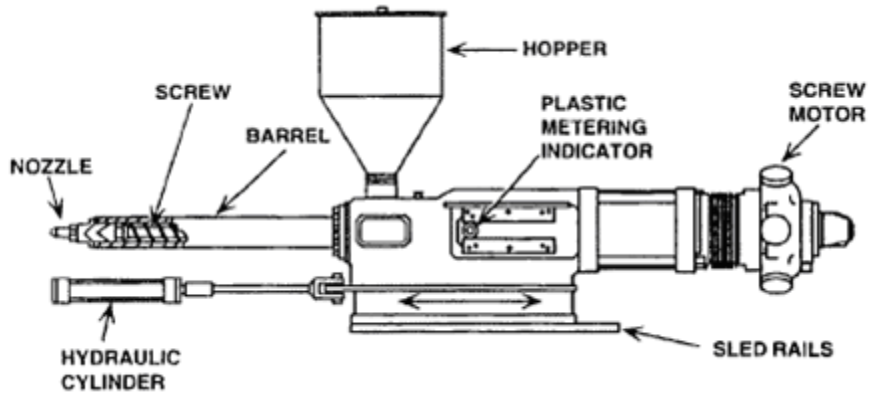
Diagram of a reciprocating screw injection unit (Harper, 2000)
